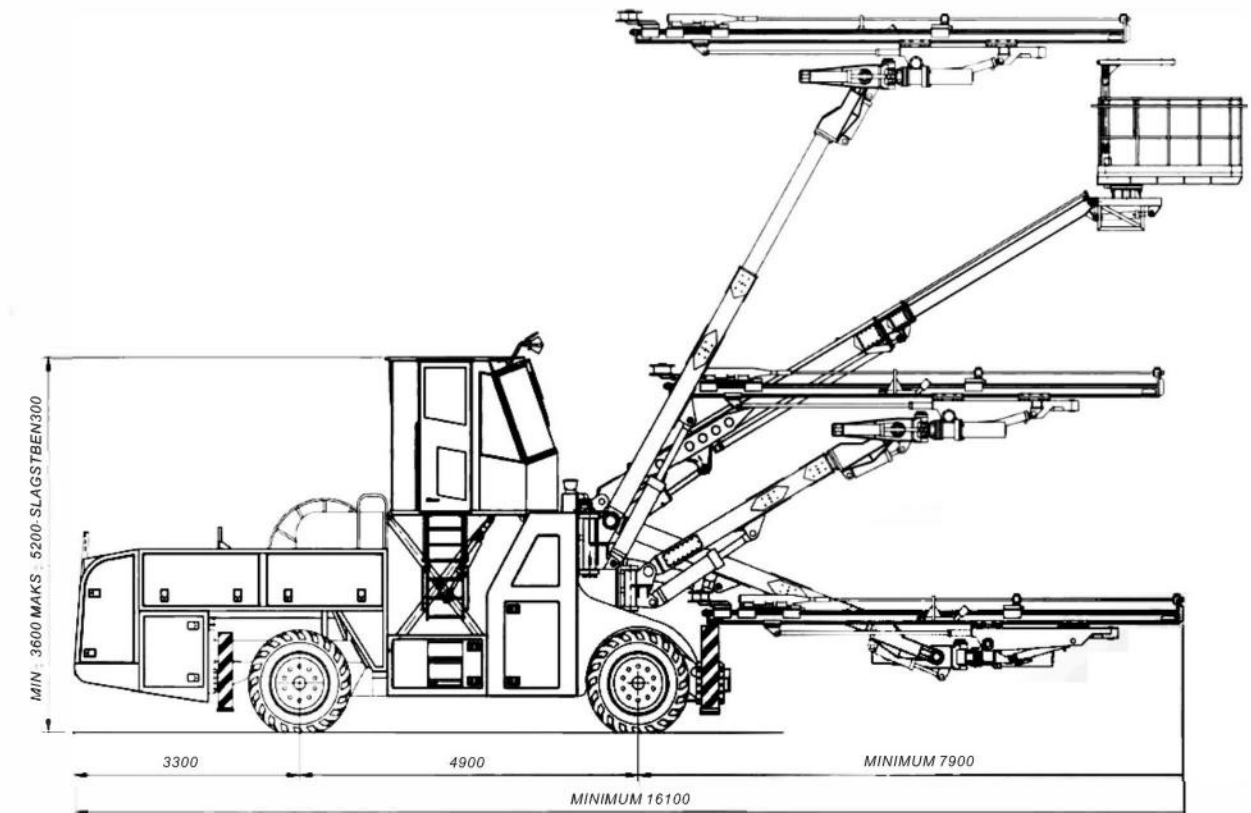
ZYS113 Computer Controlled 3 Boom Drill Jumbo Dimension
